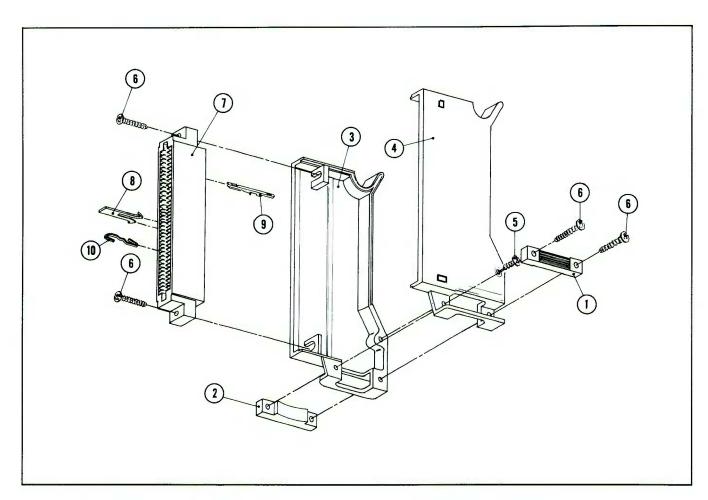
External I/O Connector Assembly, (HP, P/N 5060-2806) Exploded View
